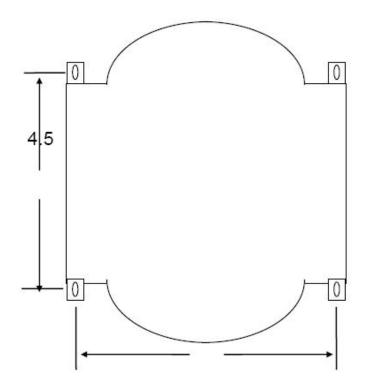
SPT-8 POWER TRANSFORMER, TOP VIEW
